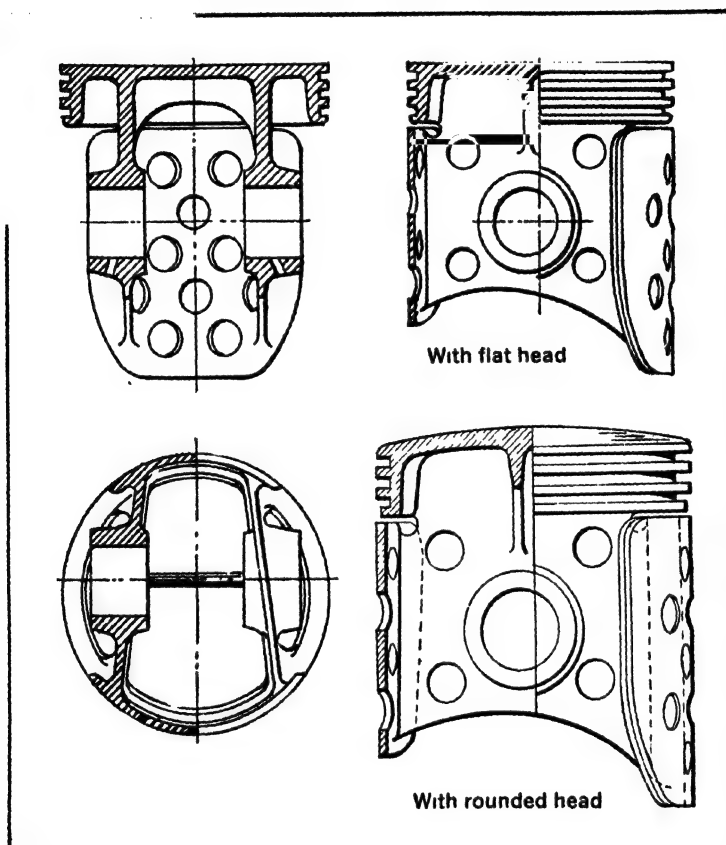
Sectional View Showing Construction of Flat and Round Head Types of Ricardo Slipper Piston Designed for High-Speed Engines.
